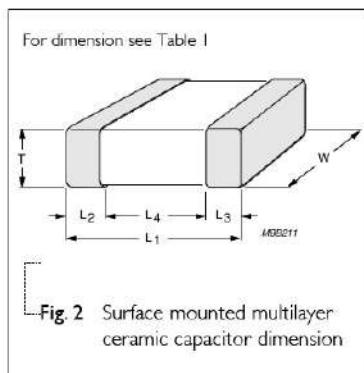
Surface mounted multilayer ceramic capacitor dimension
